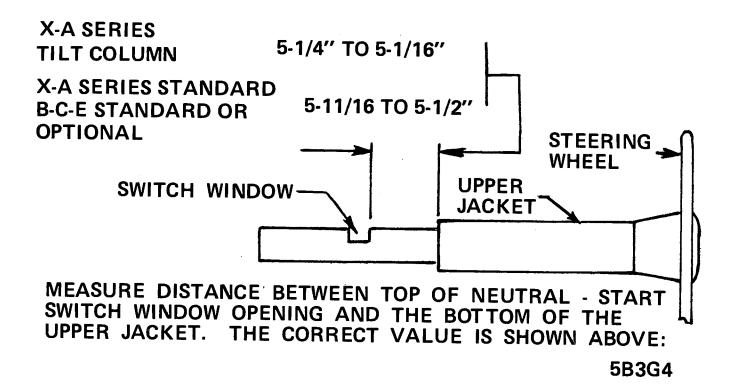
G-4 - X-A-B-C-E Series - Checking for Column Damage
